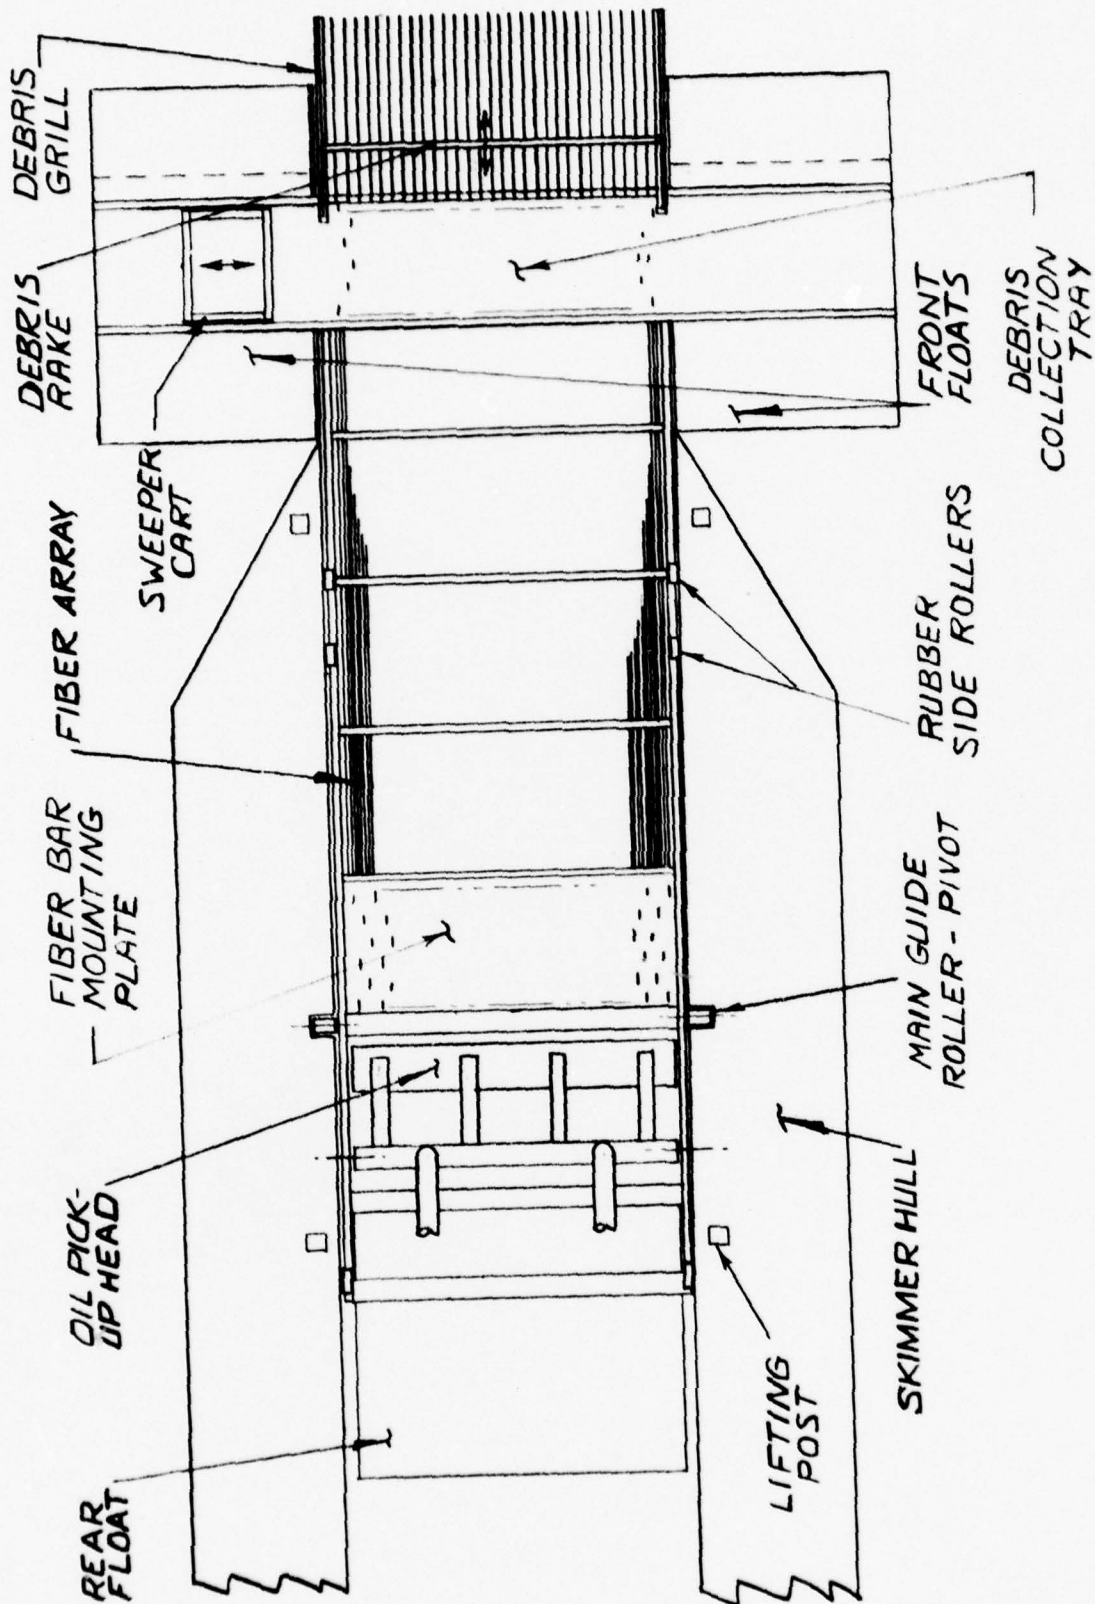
SKIMMER AND HULL ASSEMBLED (TOP VIEW)
